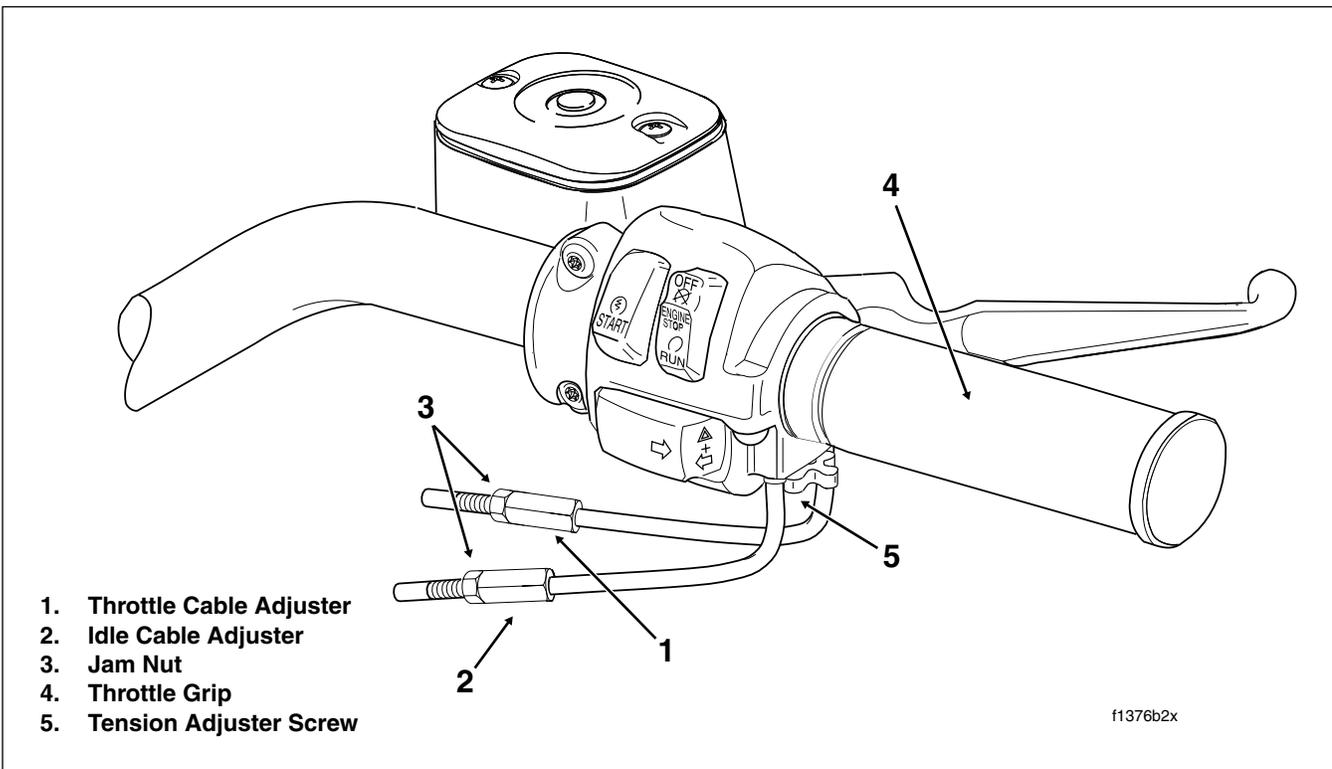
Throttle Cable Assembly - Throttle Side (FLHR)
